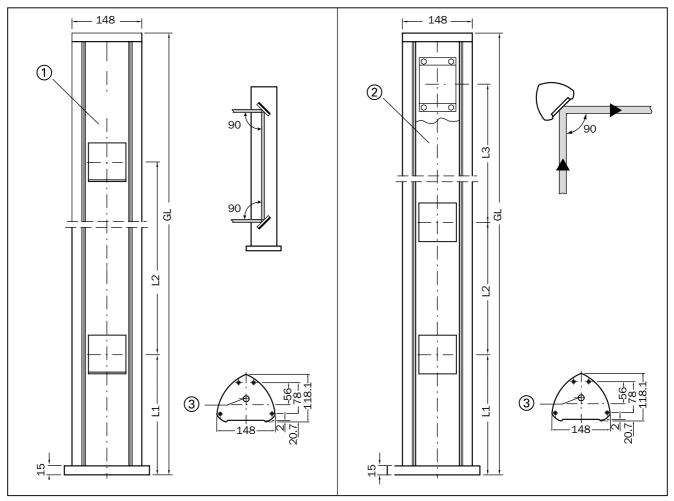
Dimensional drawings and mechanical detail for mirror columns
